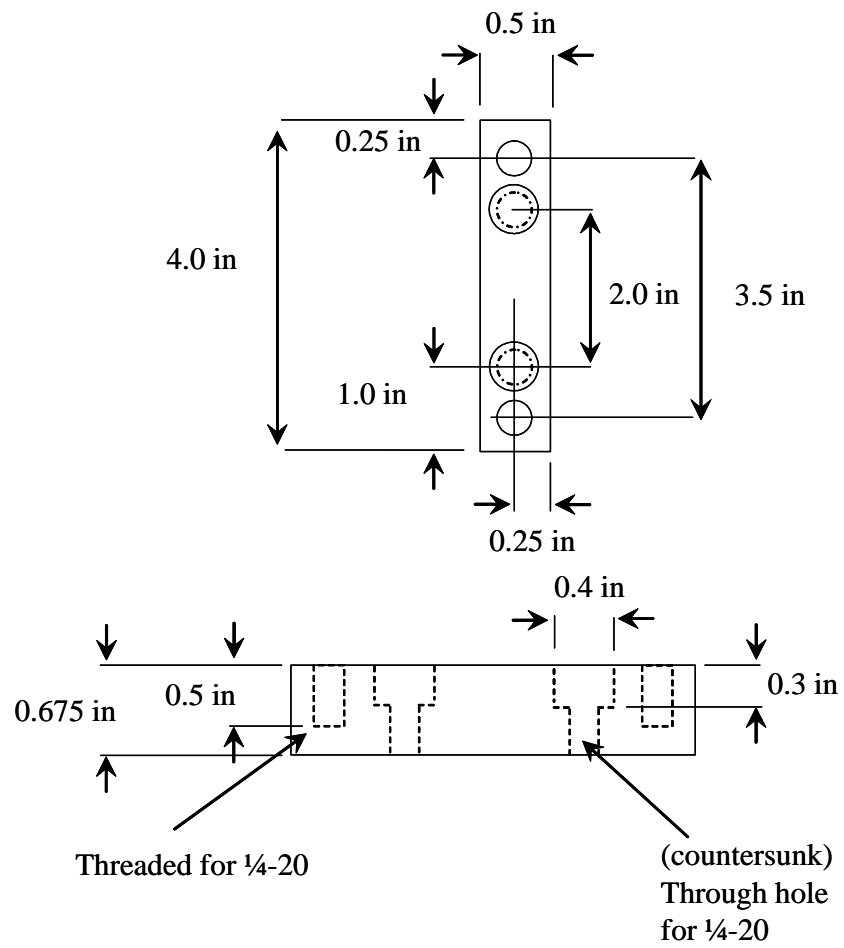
Technical drawing of mounting blocks used for thermal isolation. These have been fabricated in both Macor ceramic and Teflon.
